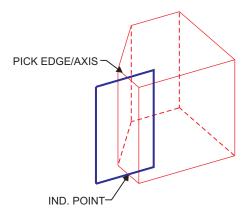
PLANE >> PERPENDICULAR EDGE
